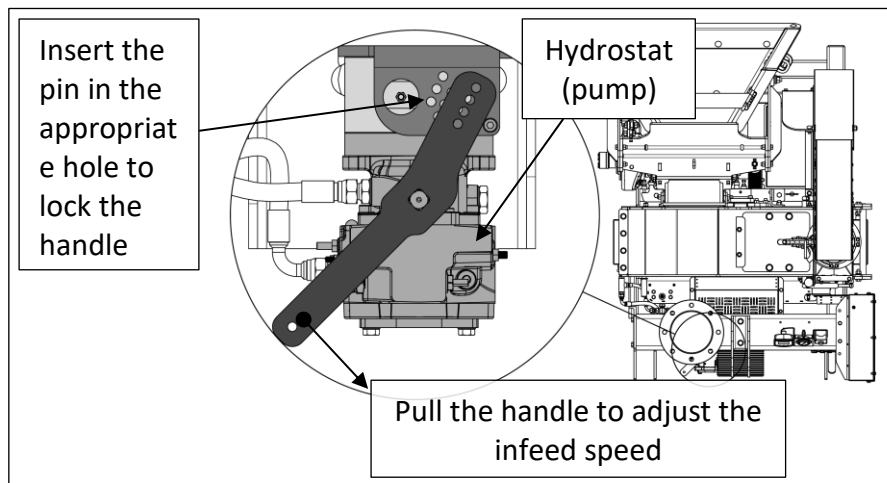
Setting the infeed speed for PC-3300-PIC and PC-3300-SIC
